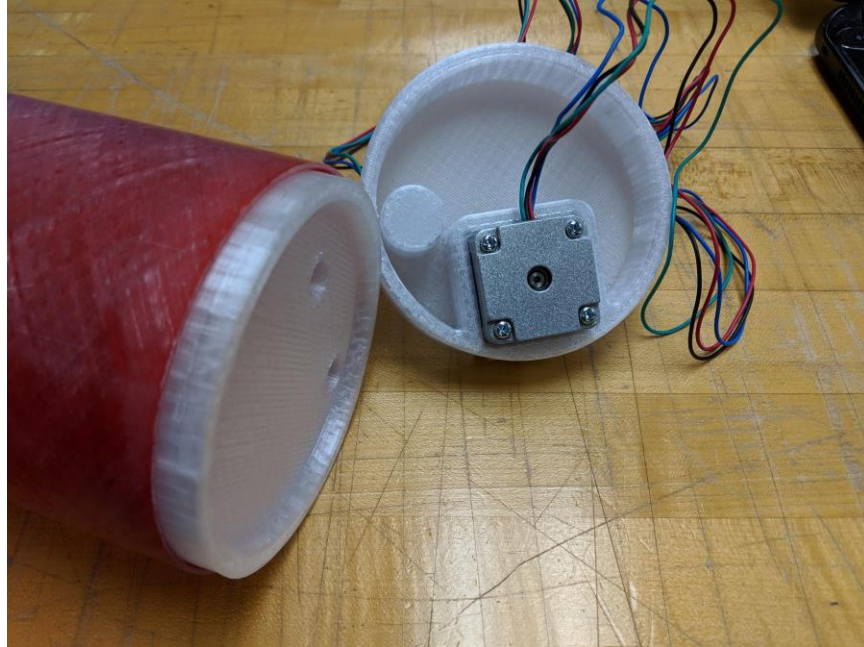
Preliminary fit and tolerance testing of the 3D printed fore and aft bulkheads. The dimensions of the bulkheads will be adjusted to allow a smooth deployment without excessive friction or any binding of the fore bulkhead.
